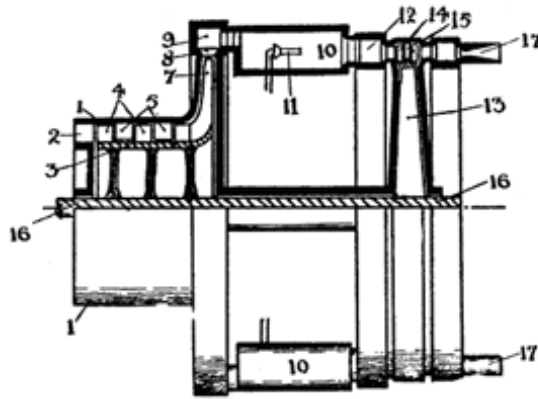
Reproduction of Whittle's first jet engine patent [135]. The numbered components are 1. Axial compressor casing 2. Intake 3. Compressor body 4. Compressor blades 5. Stator blades 7. Centrifugal compressor 8. Compressor outlet 9. Elbow 10. Combustion chambers 11. Fuel injector 13. Turbine disc 14. Turbine blades 15. Stator blades 16. Shaft 17. Divergent nozzle ring.
